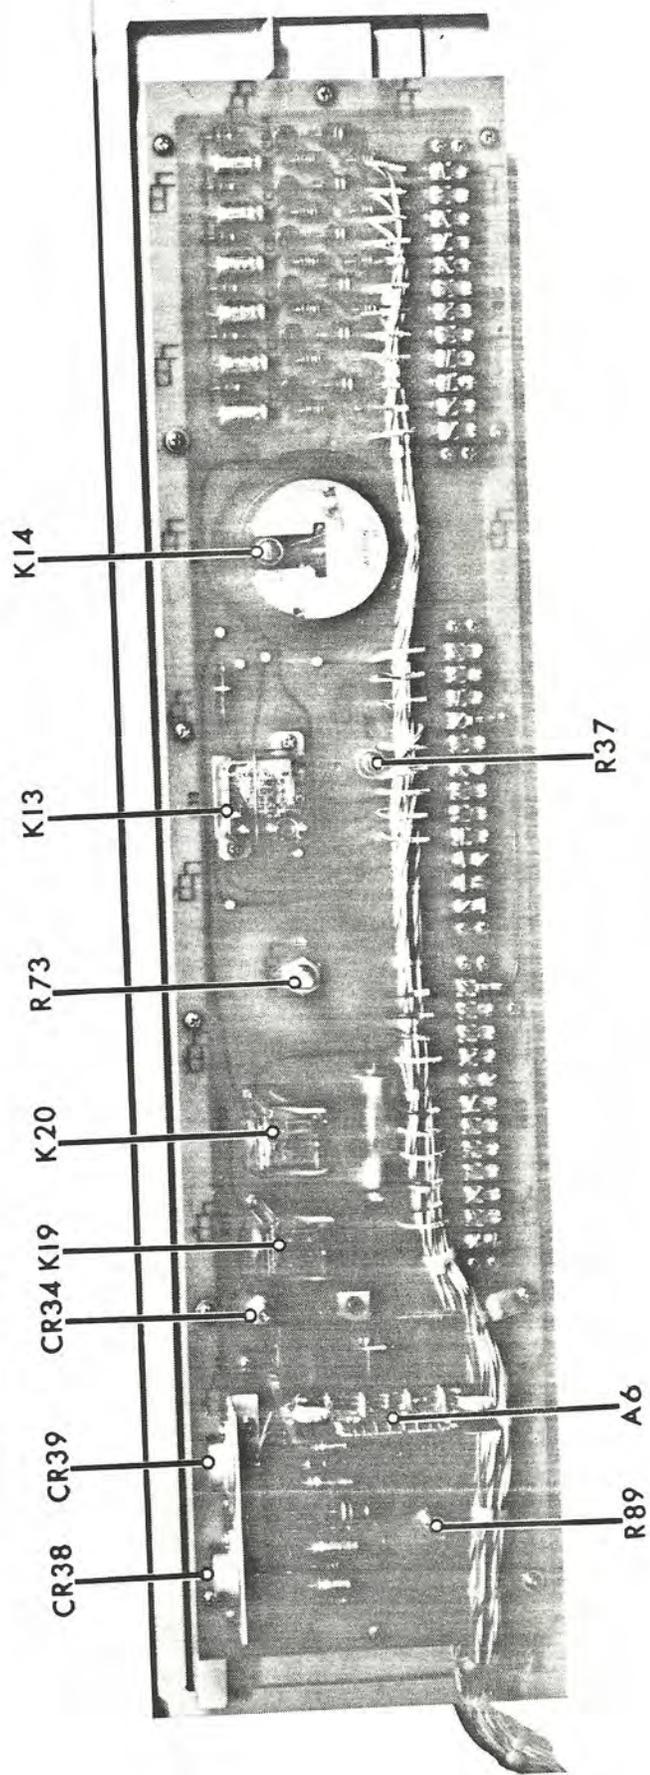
B PA CONTROL PANEL-REAR VIEW
